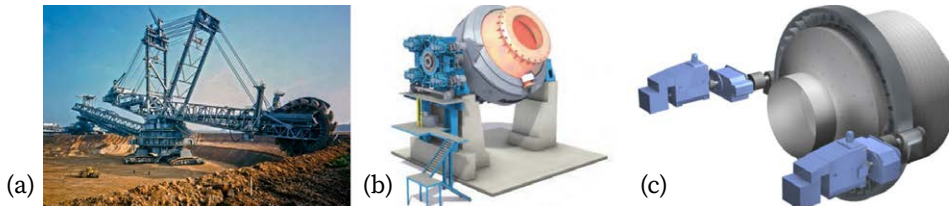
Industrial machines with multi-motor gear drives:
